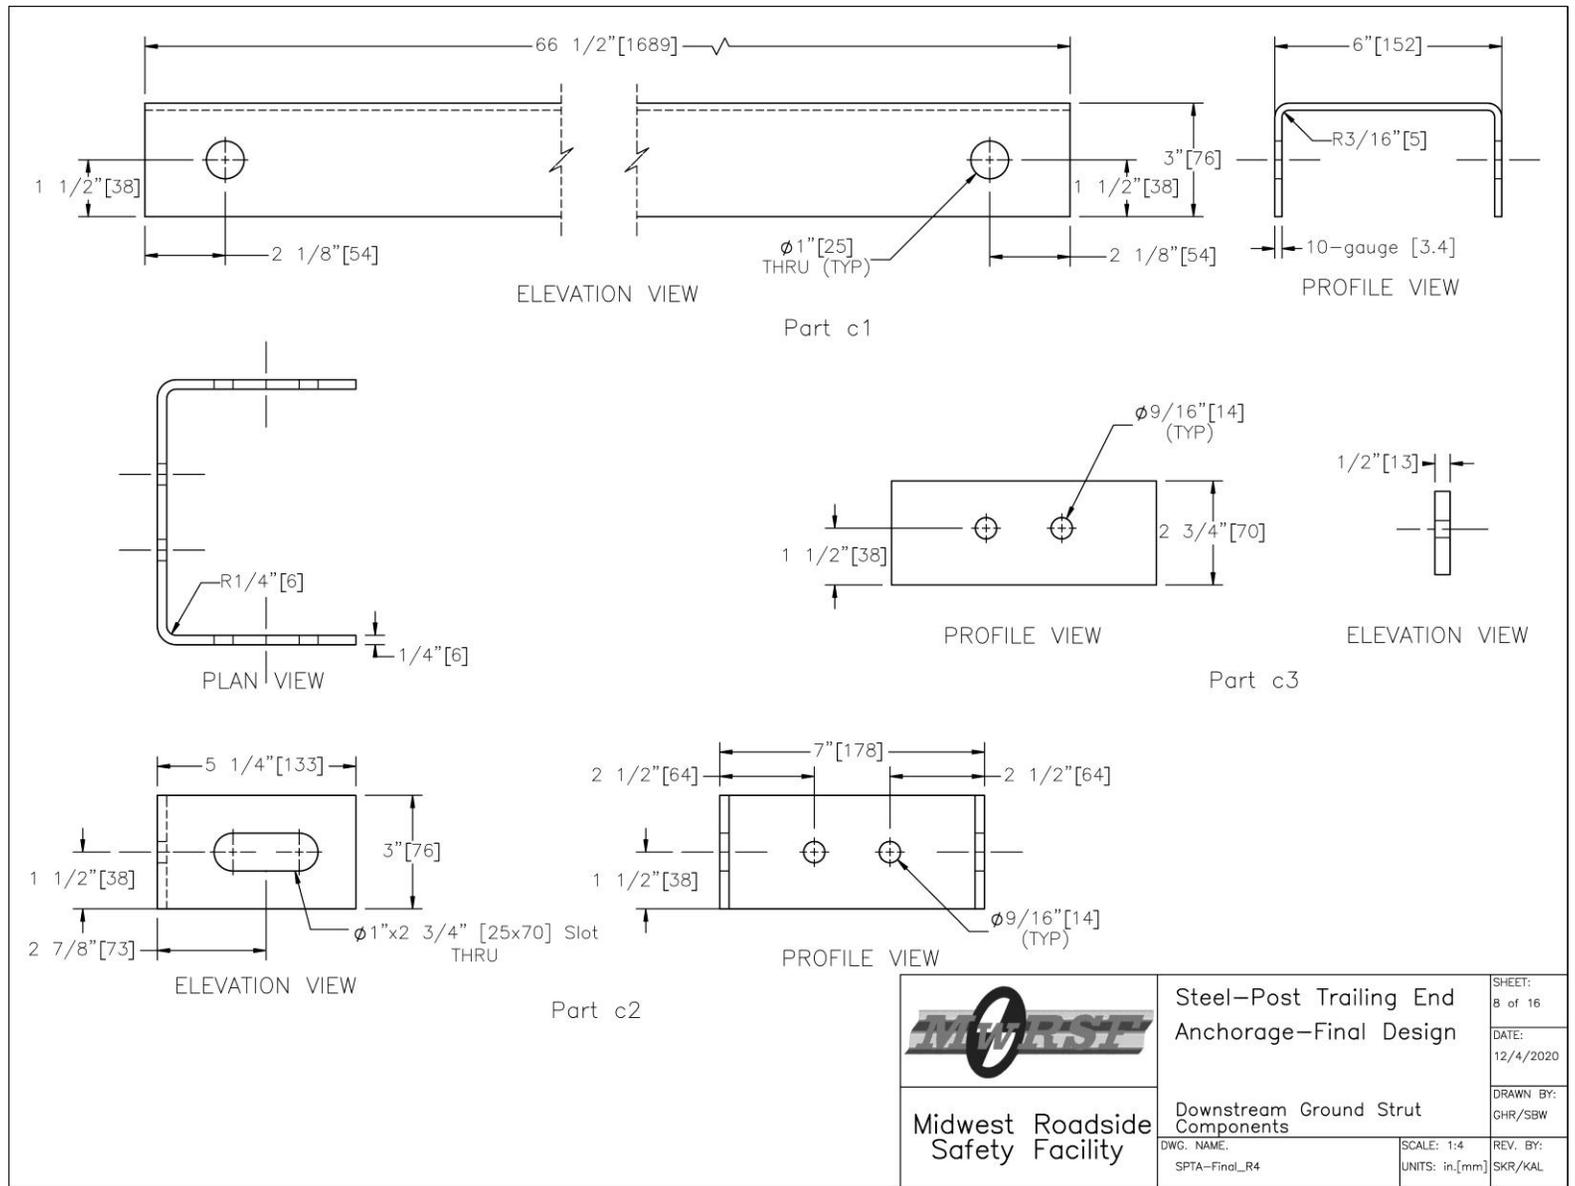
Steel-Post Trailing End Anchorage, Downstream Ground Strut Components
